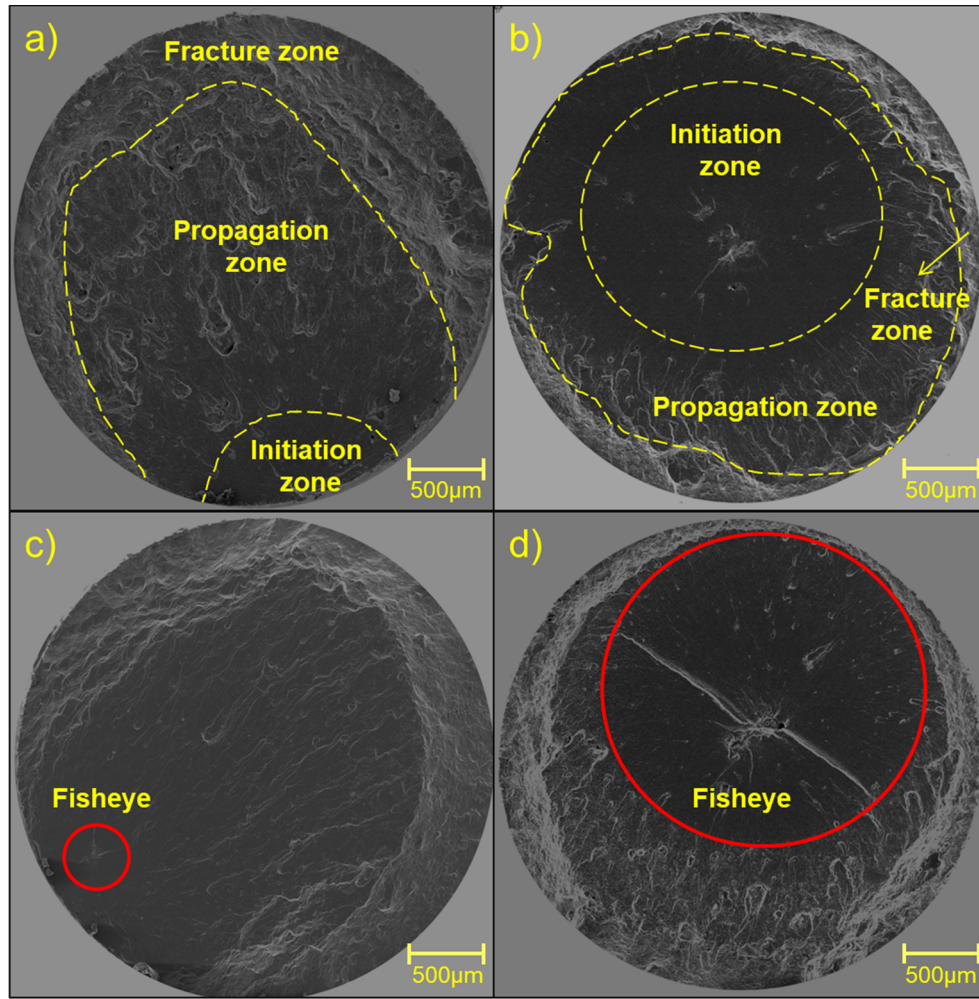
Fracture surface of 0° built and 90° built specimens: a) crack initiated from surface, the initiation zone is usually a semi-circle. b) crack initiated from interior, the initiation zone is usually a circle, forming a fisheye pattern. c) fracture surface of 0° built specimen. d) fracture surface and fisheye pattern in 90° built specimen. Fisheye is marked by red circle.
